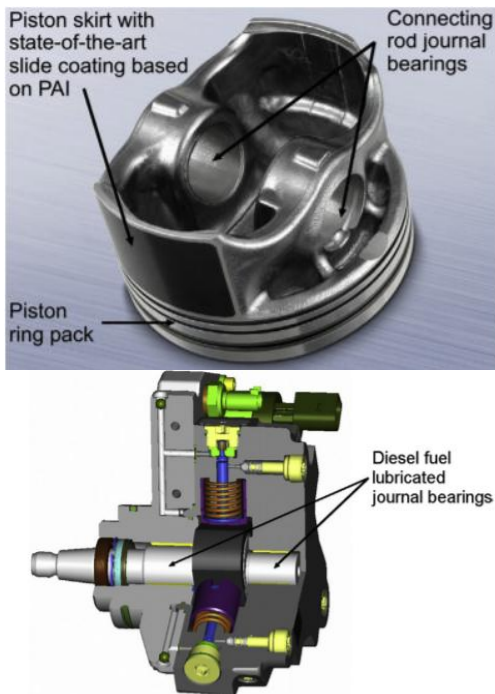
From left to right, diesel engine piston and fuel injection pump showing where slide coating can be applied [39]
